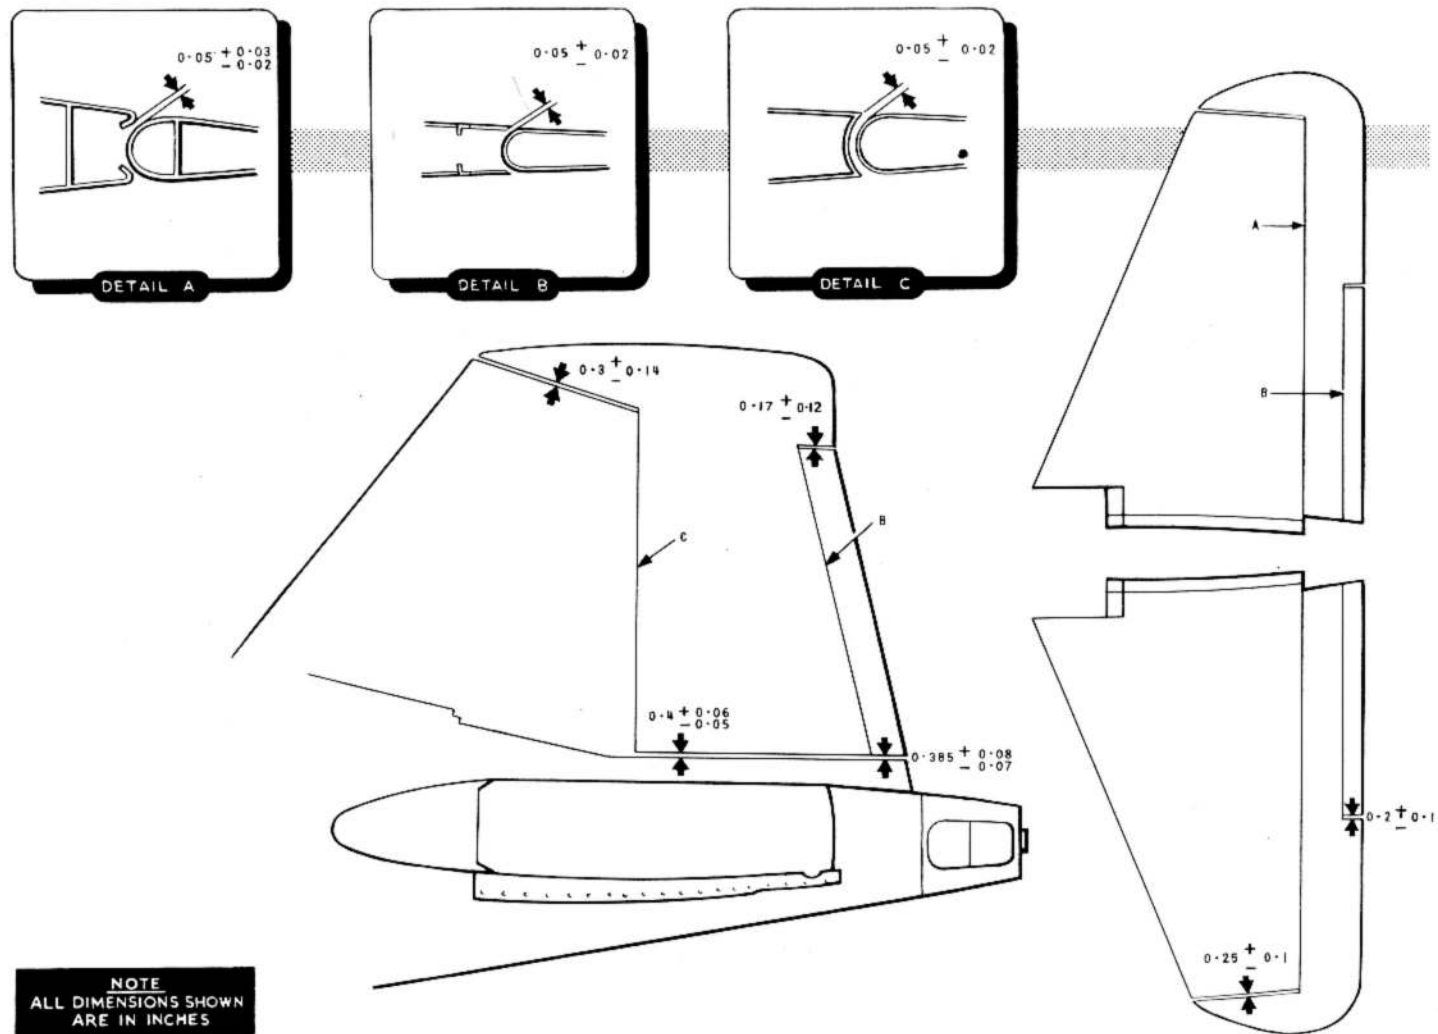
FIN, RUDDER AND ELEVATOR CLEARANCES
